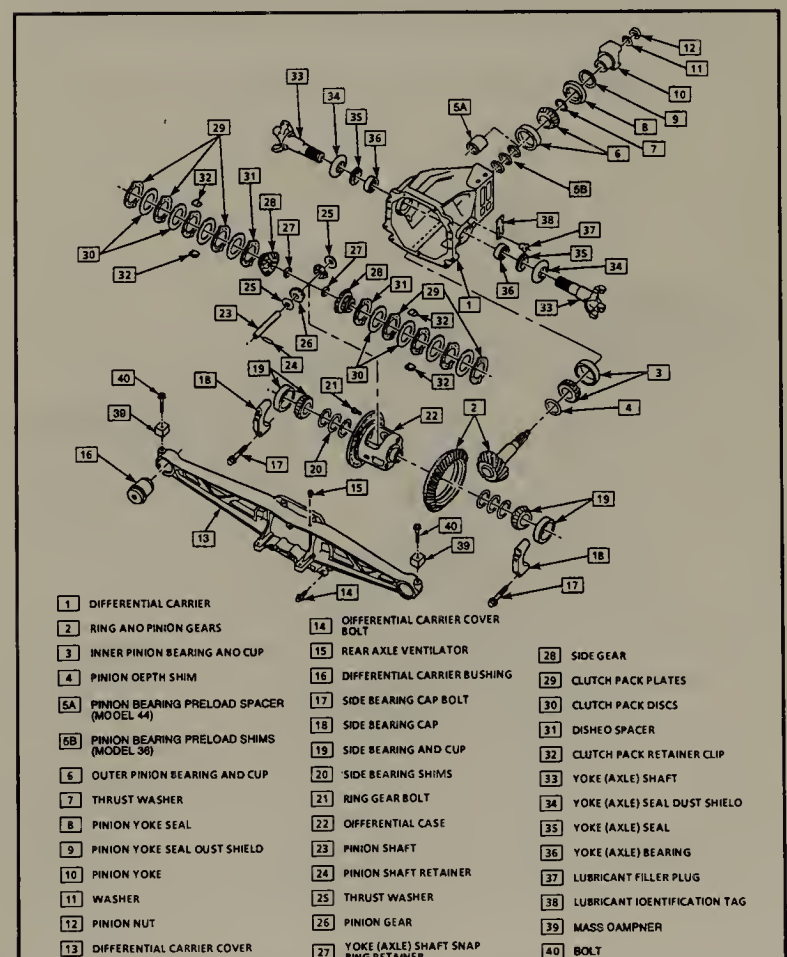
Exploded view of the rear axle components—1996 vehicle shown, others similar
